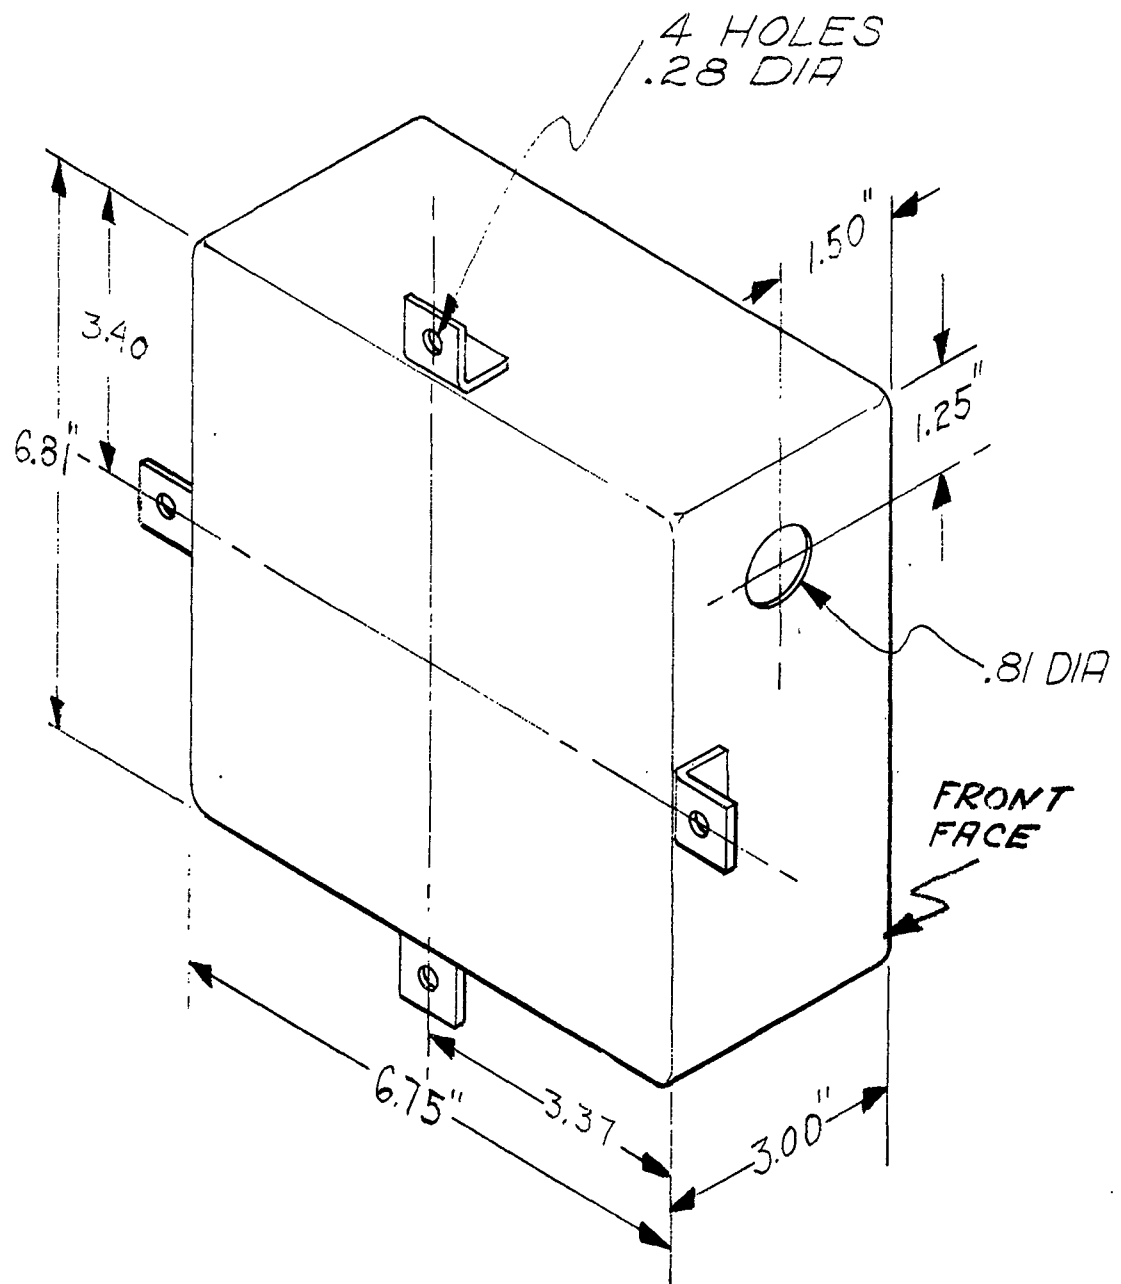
Outline Dimensions of Alarm & Driver Assembly
